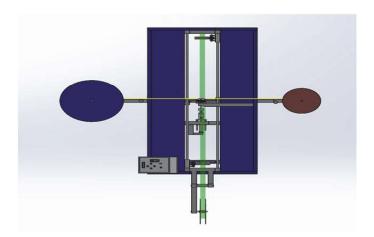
TOP VIEW OF KNITTING MACHINE
